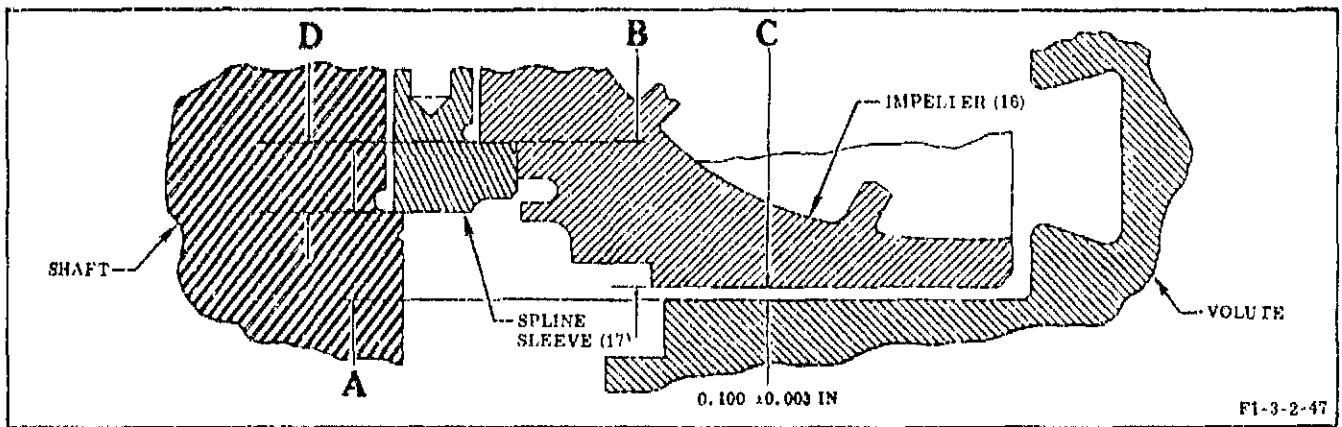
Checking Oxidizer Impeller Rib-to-Volute Clearance
